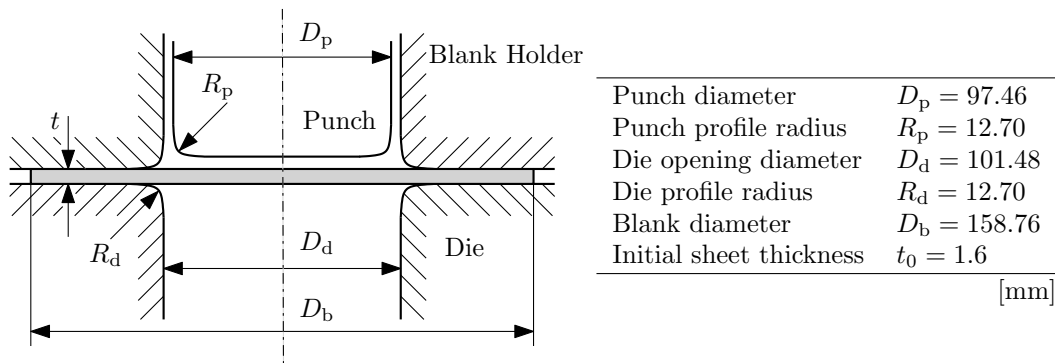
Cylindrical cup drawing test - Scheme of the drawing process.
